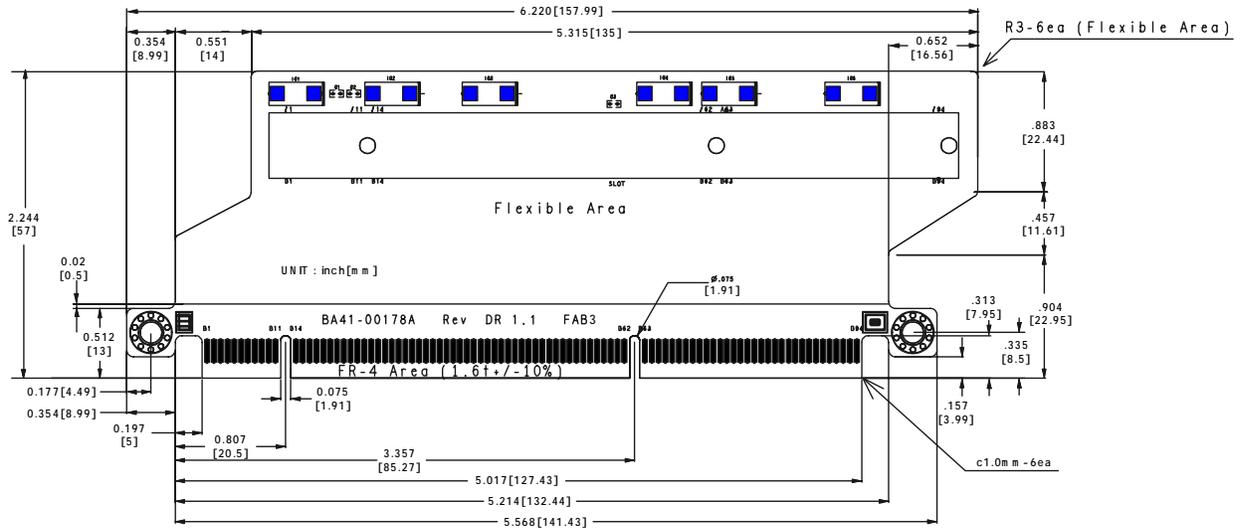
Component and Connector Placement of Flexible Printed Circuit
